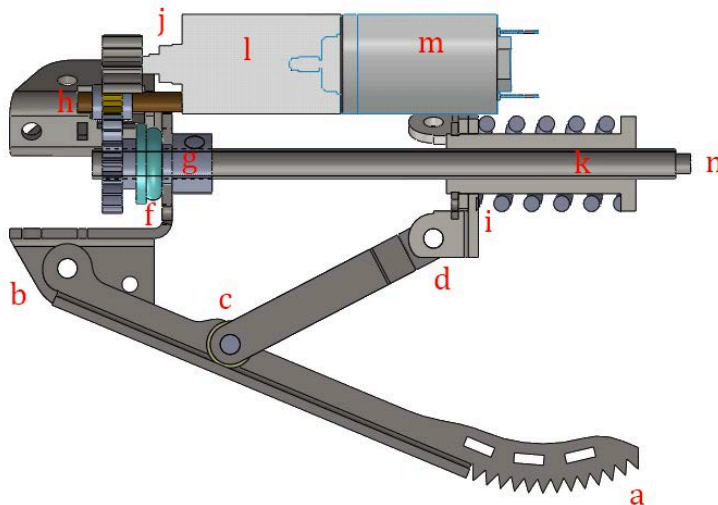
Main parts of the clamping mechanic of the clamping module. All parts causing friction in the system are marked.
